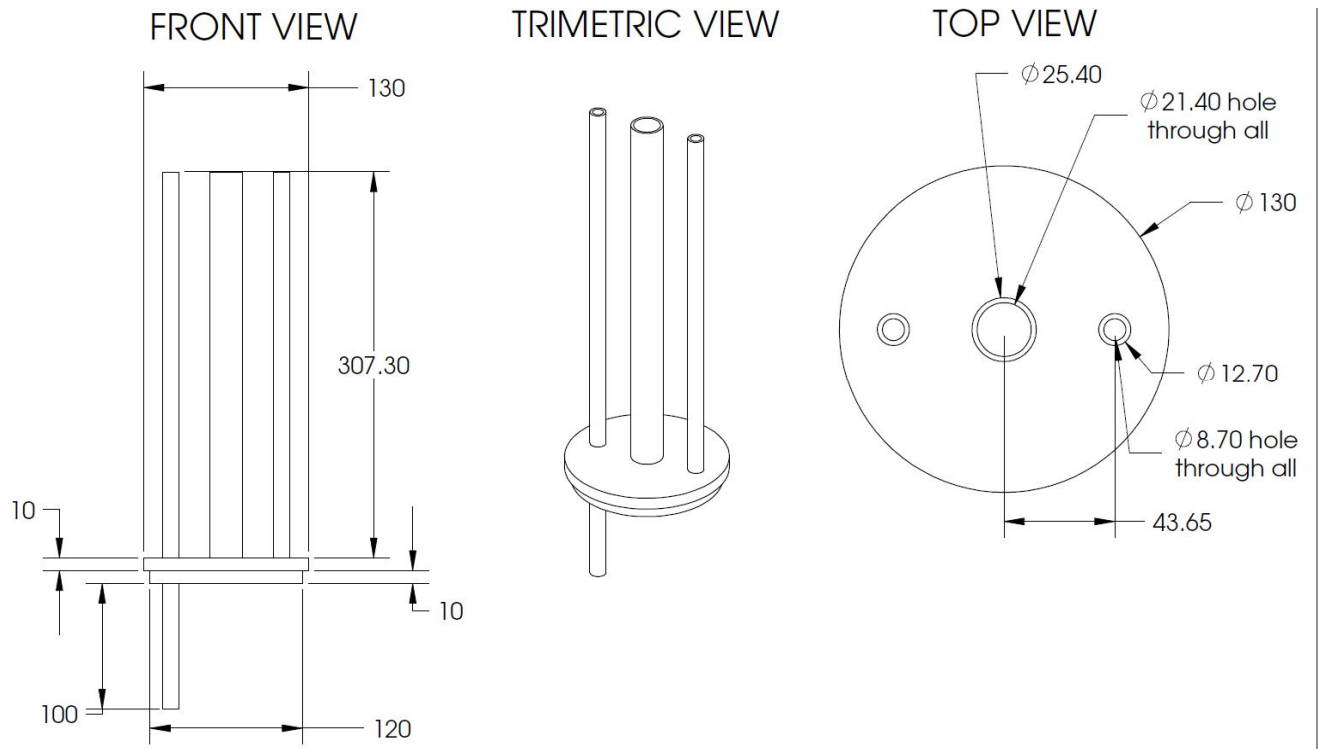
Alumina crucible specifications. Dimensions are in millimetres.
